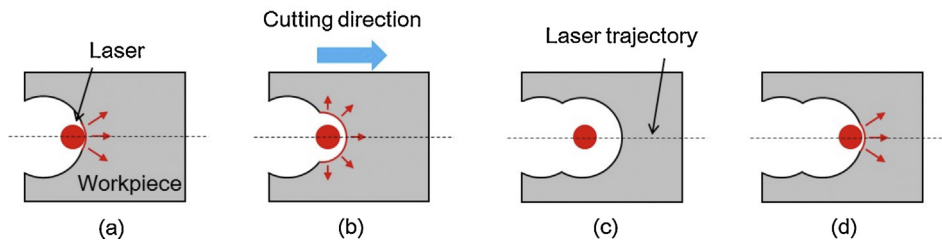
Striation formation mechanism (top view): (a) laser starts melting workpiece, (b) leading edge goes ahead of laser, (c) melting workpiece stops due to the insufficient temperature on leading edge, (d) laser catches up with leading edge and restarts melting workpiece.
